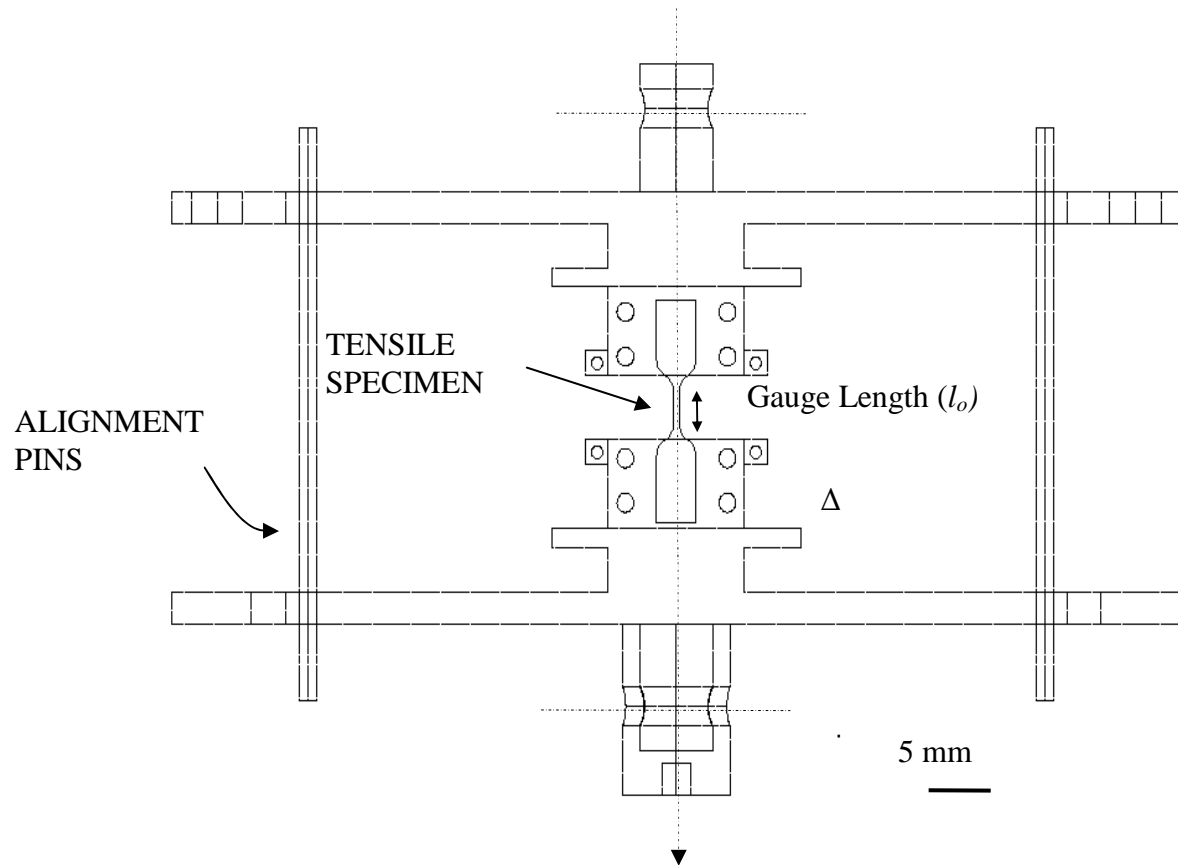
Auxiliary test fixture used in the tension test system. The tensile specimen had a gauge length (l_0) of 5 mm and a width of 1 mm. Δ is the machine crosshead displacement.
